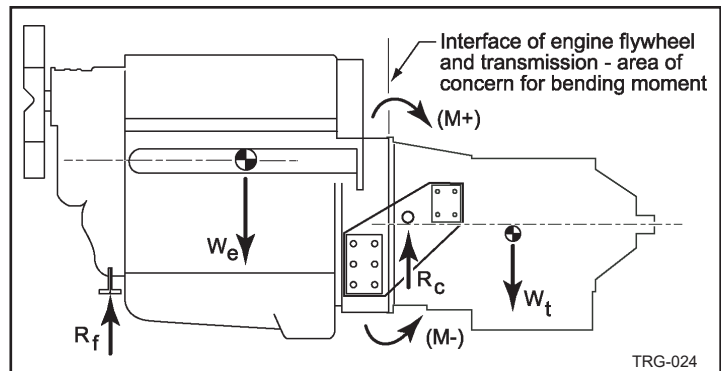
Typical Cradle Mount Using Engine Flywheel Housing and Transmission Side Pads
